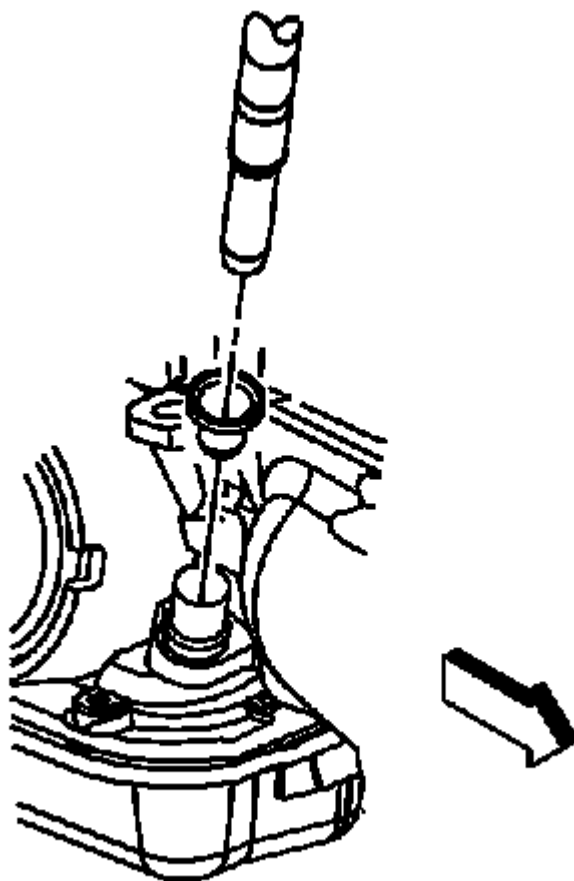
View Of Transmission Converter Cover Bolt (4L80-E)
